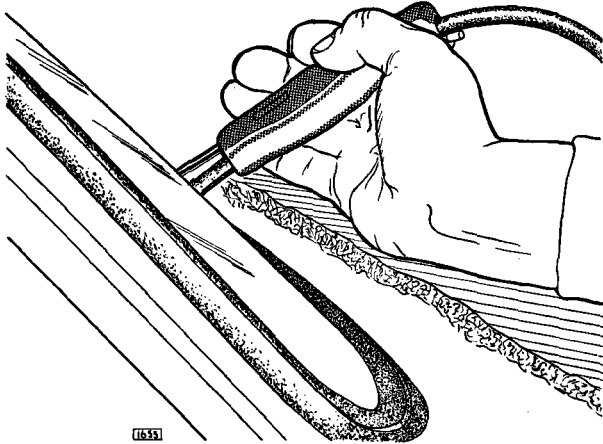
Using the special tool ('B', Fig. 15) for inserting the rubber sealing strip in the windscreen sealing rubber.
